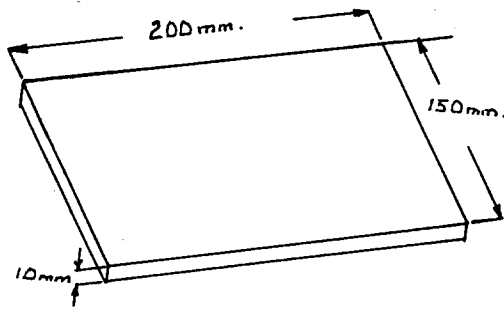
Construct the base from a piece of 10mm plywood as shown in Fig. 1.
